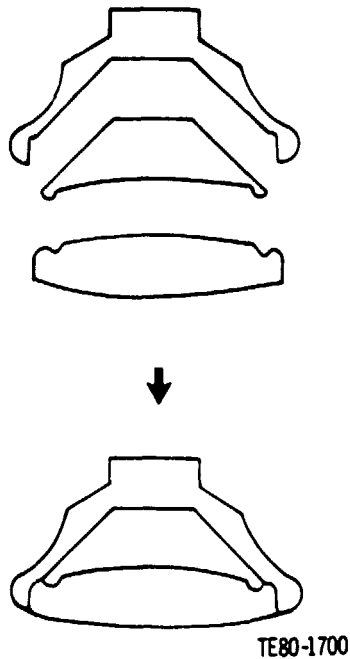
Injection-Molded Alpha Silicon Carbide Segments Used in Rotor Fabrication Studies.
